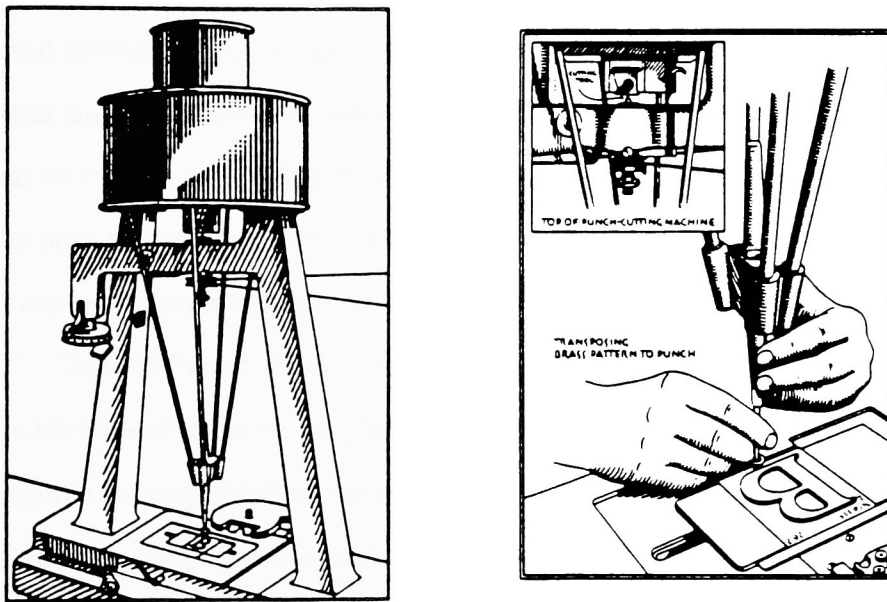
Lanston Monotype pantographic mechanical punchcutting machine with a close-up of a brass relief pattern and the cutting tool.¹⁰
